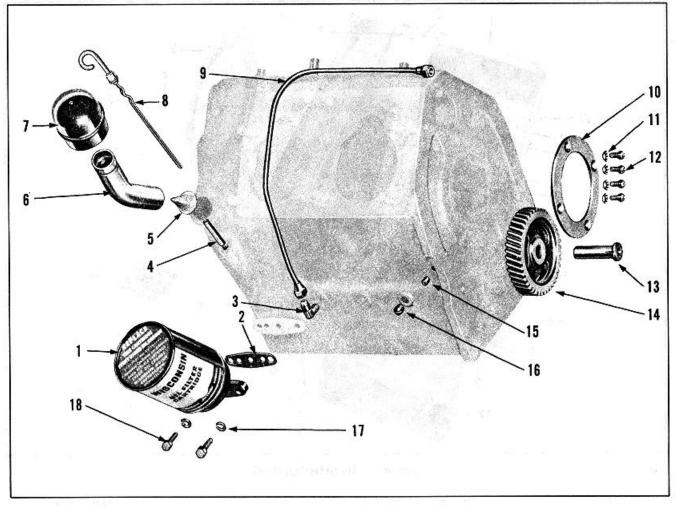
OIL FILTER AND OIL FILLER MOUNTING GROUP
